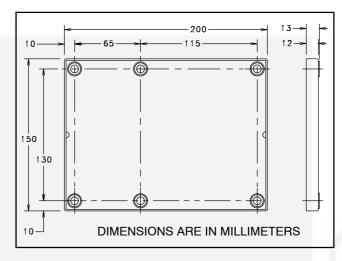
1302 CONTROL FOOTPRINT
